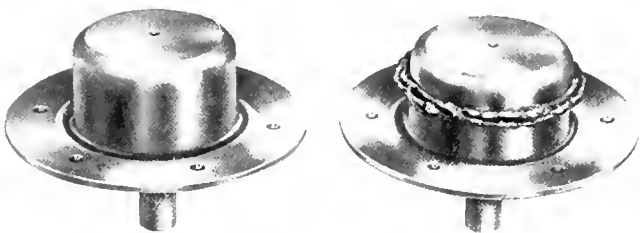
Automobile Hub Completed by Electric Welding.
